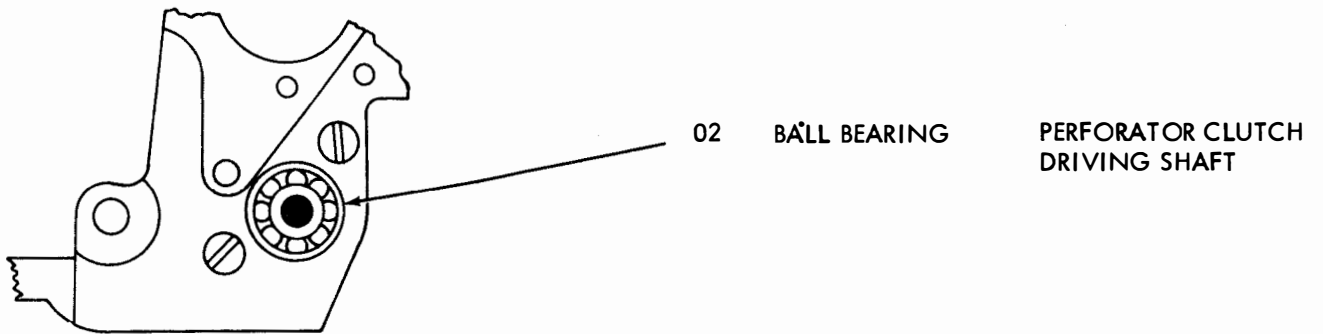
Perforator Clutch Driving Shaft Mechanism (Non-Typing)
